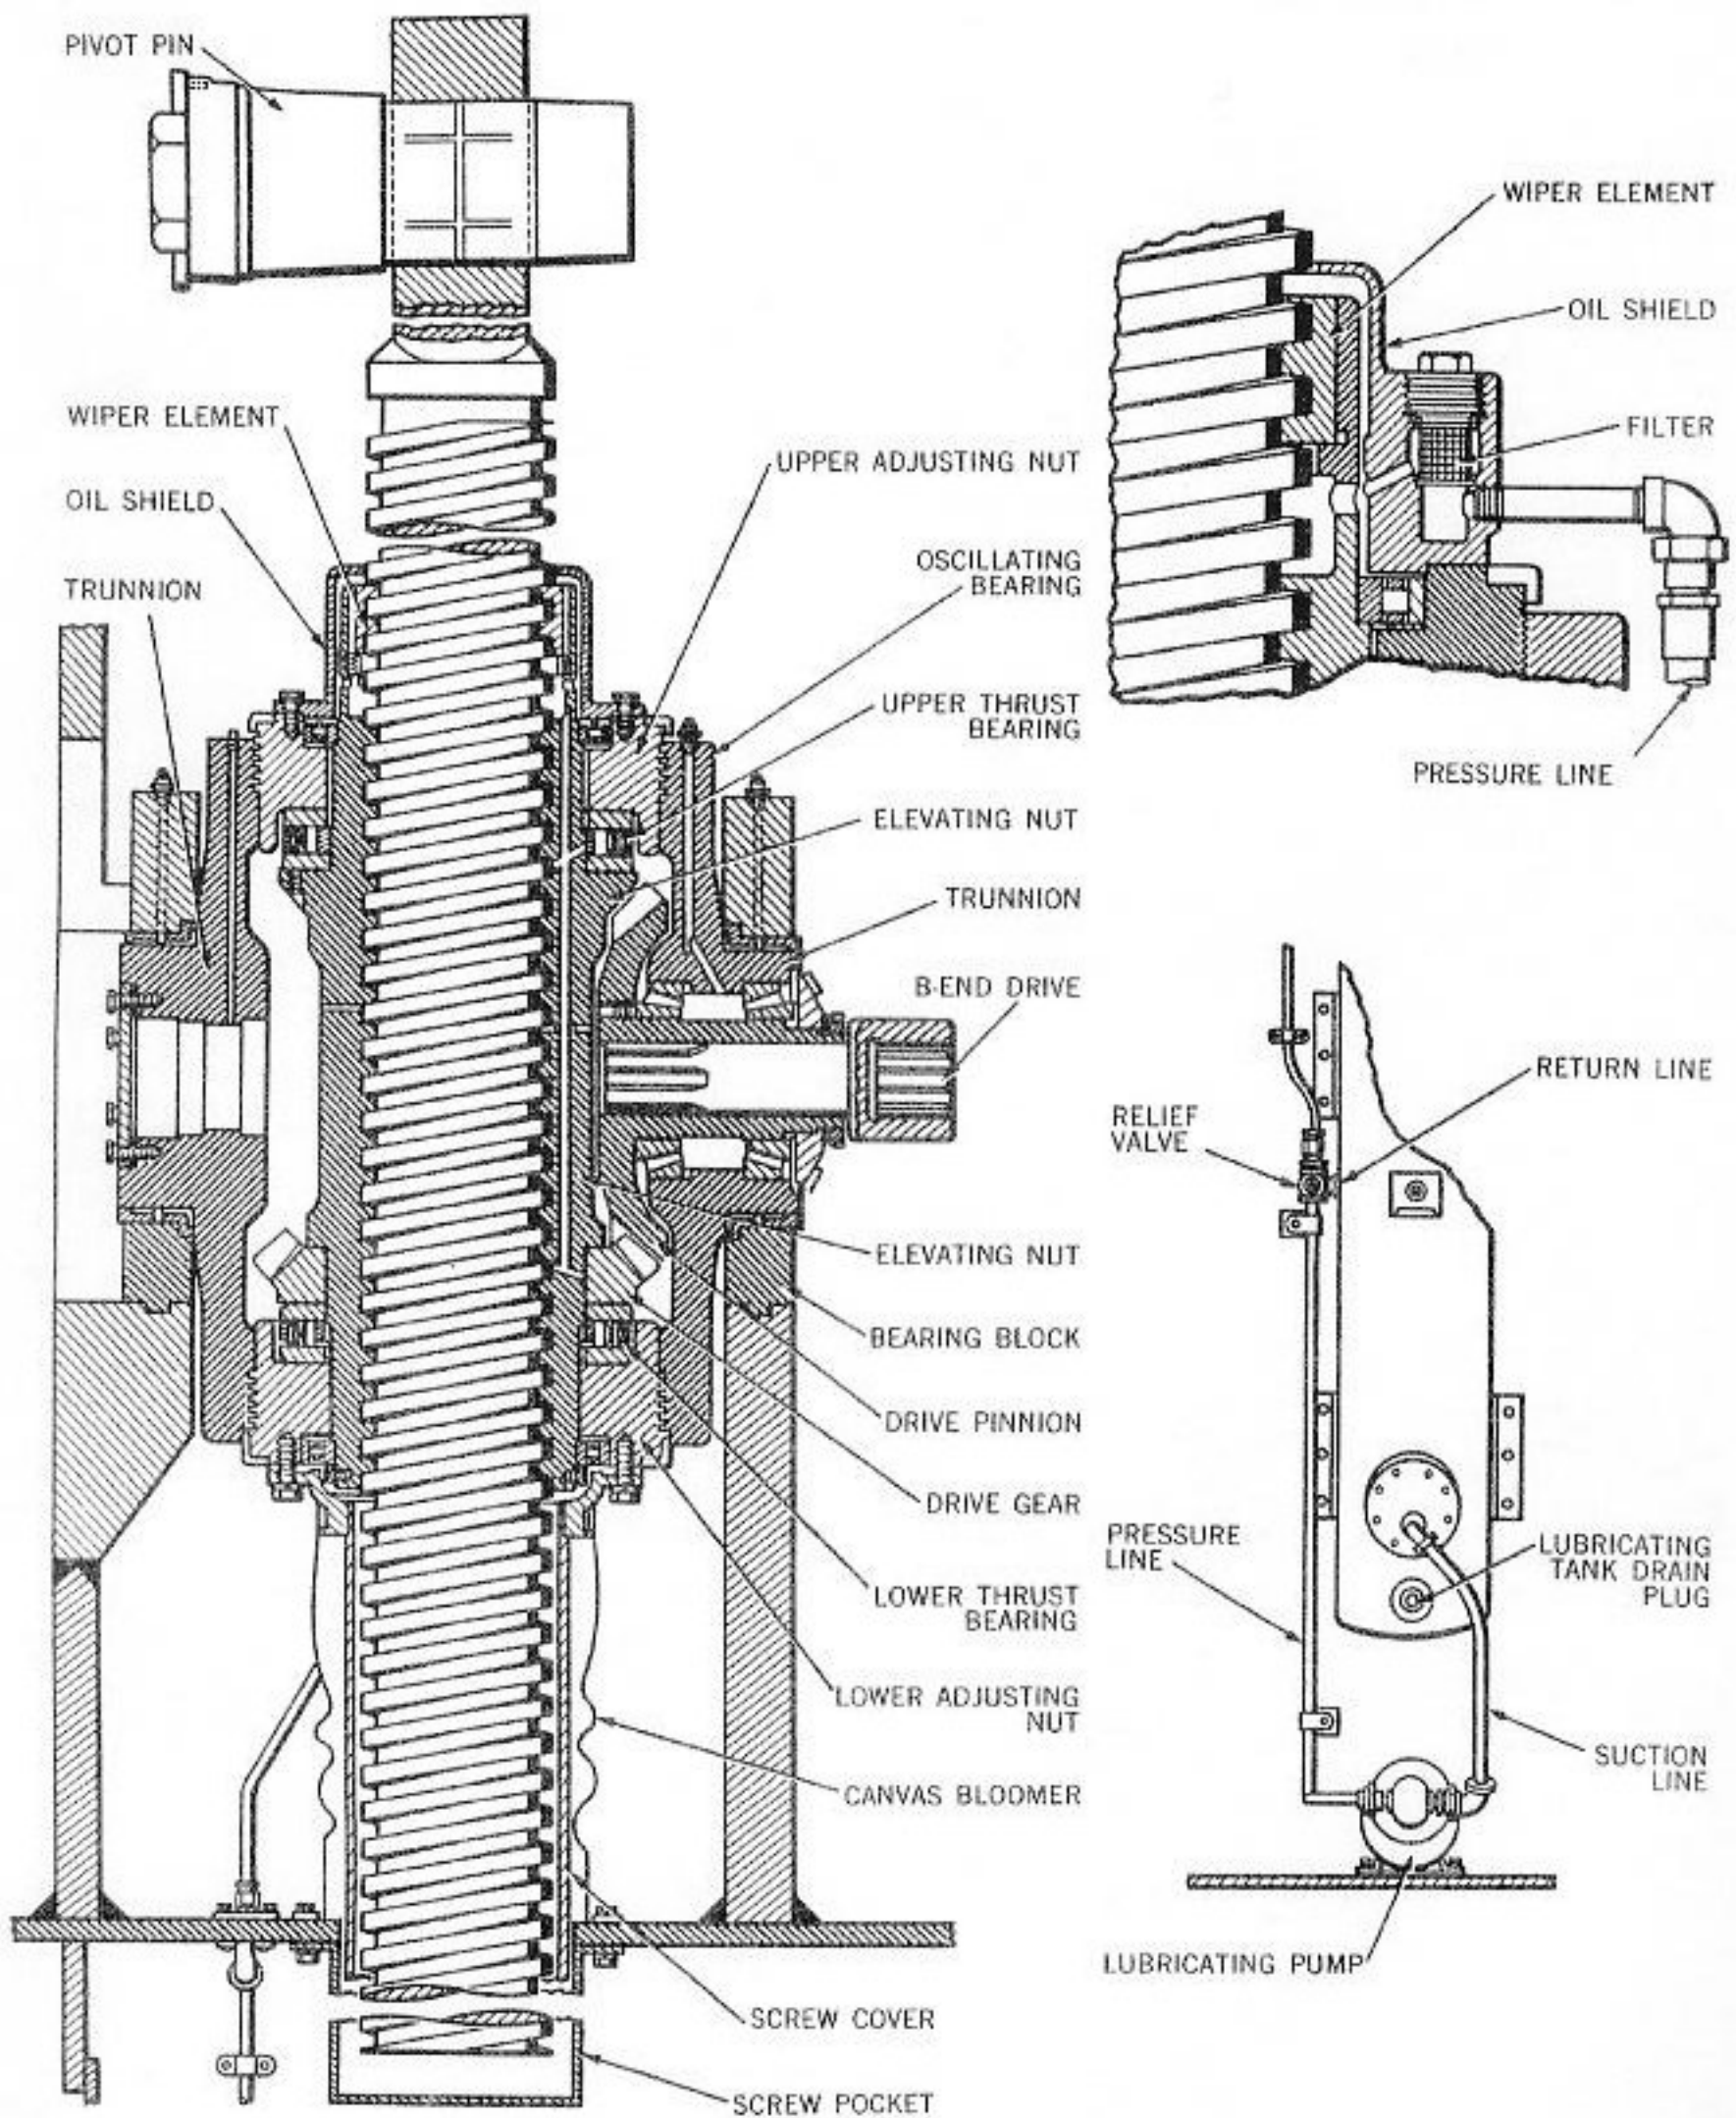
Elevating Gear Oscillating Bearing, Sectional Views
